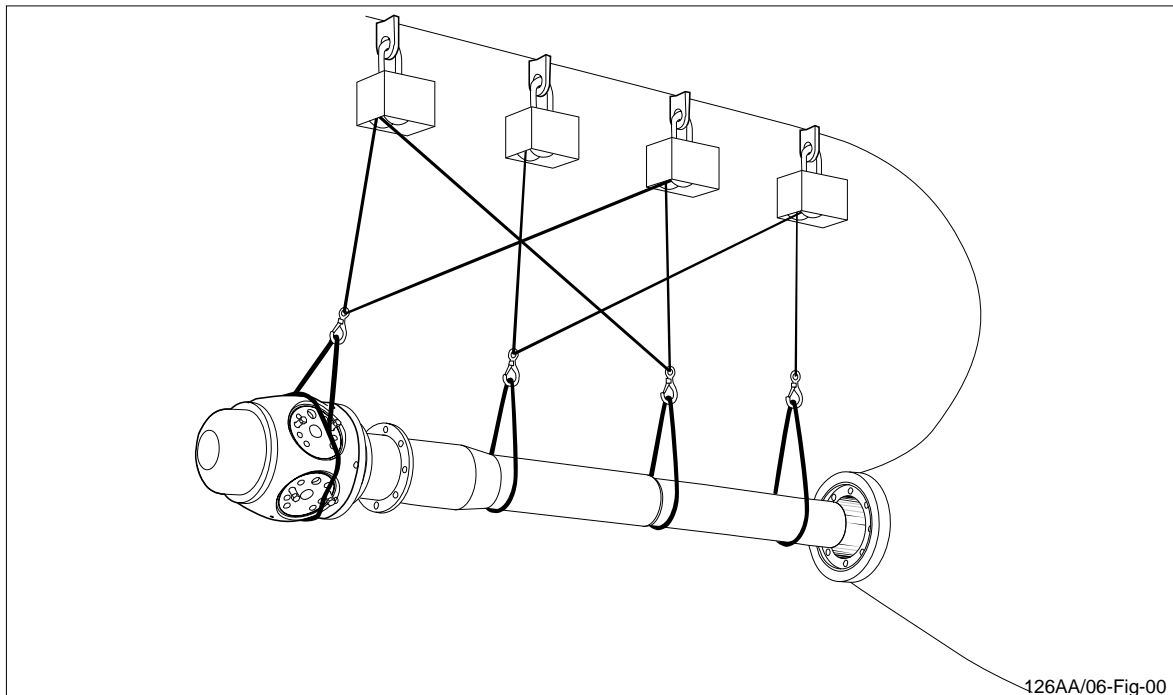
Insertion of propeller shaft with propeller hub mounted and aft stern tube seal placed on the shaft.
